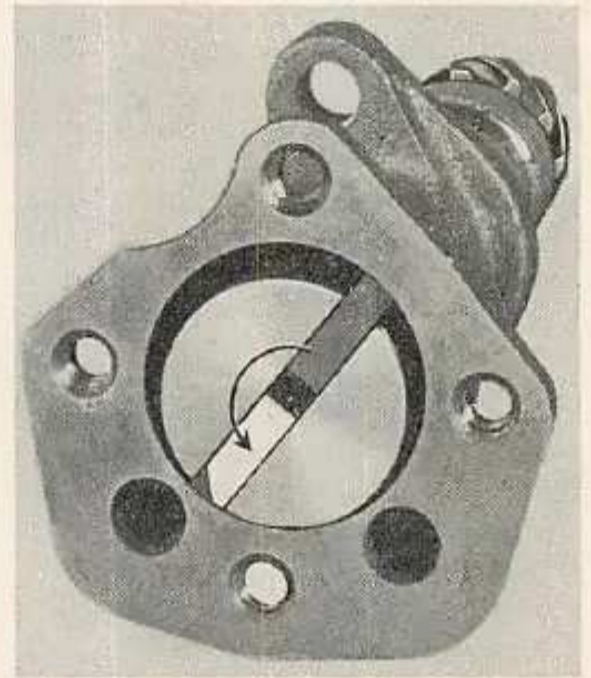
When installing pump vanes, be sure beveled edges are placed as shown.
